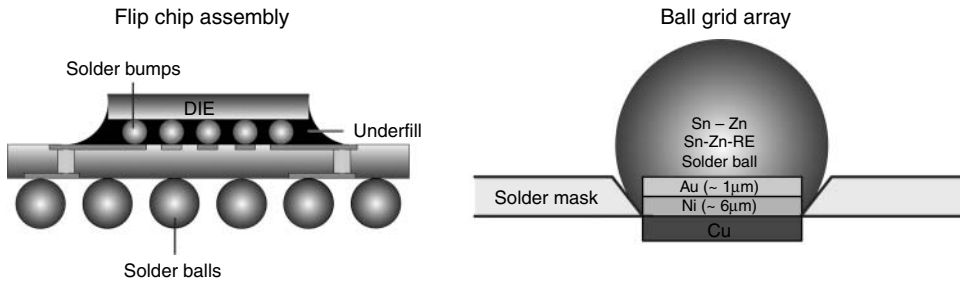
Flip-chip and Ball grid array (BGA) packaging interconnections.
